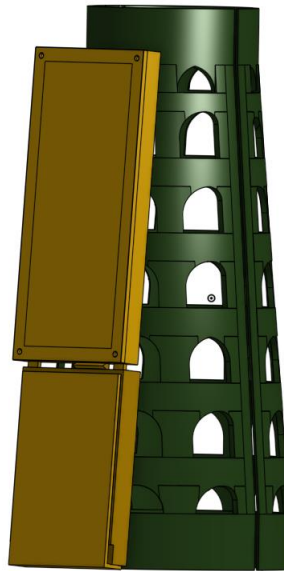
Assembly of the cage with the electronic, realized with the assembly tool in Onshape
